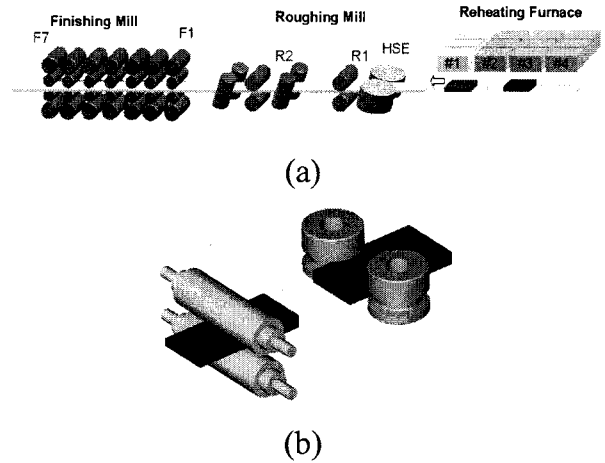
(a)Layout of hot strip mill and (b)pilot mill
